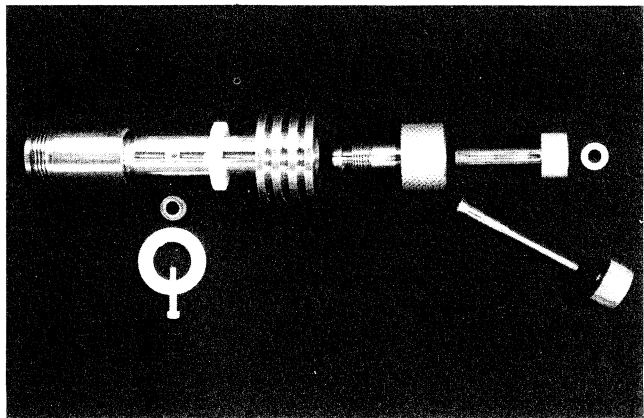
Photograph of Disassembled Slug-Tuned Circuit.
